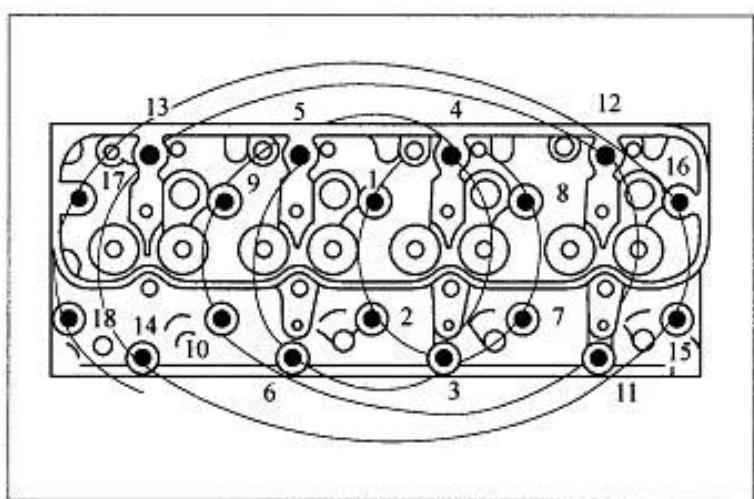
Tightening Sequence of Cylinder Head Bolts
